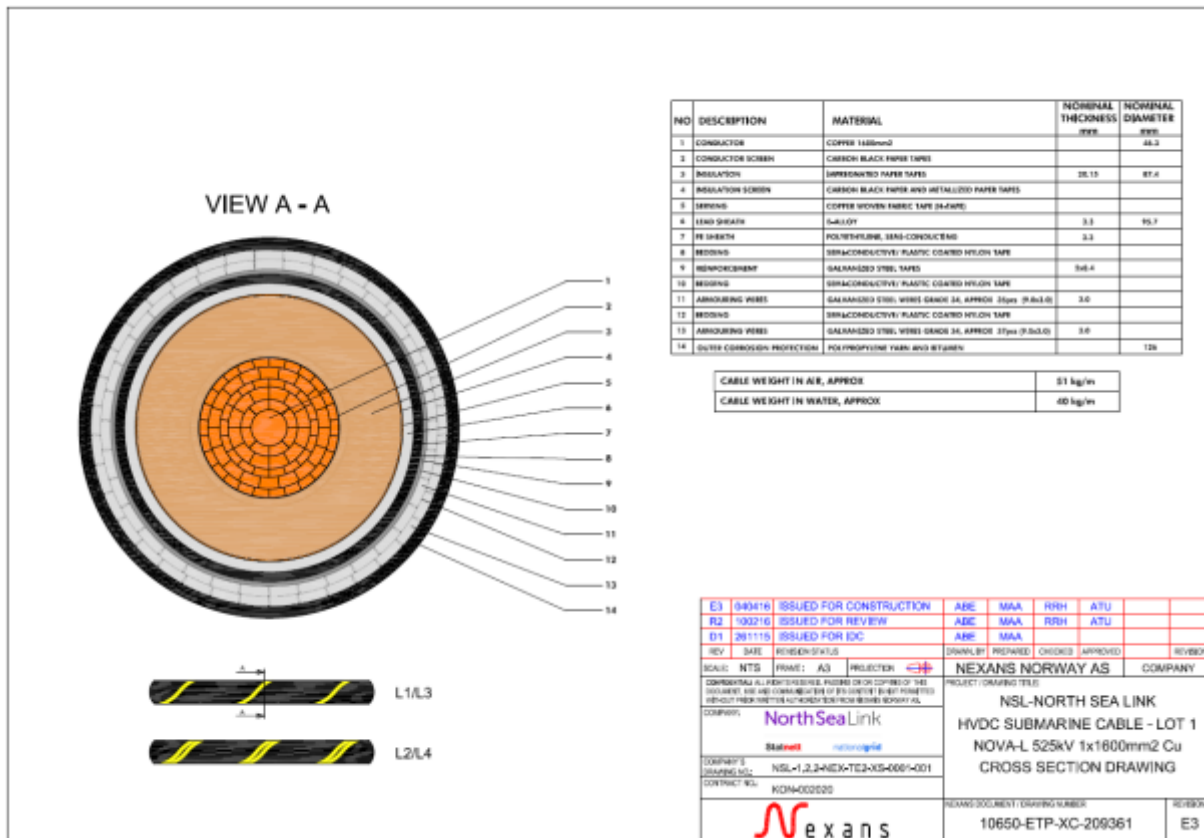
Cross section sketch of HVDC cable (Tunheim, 2016).
